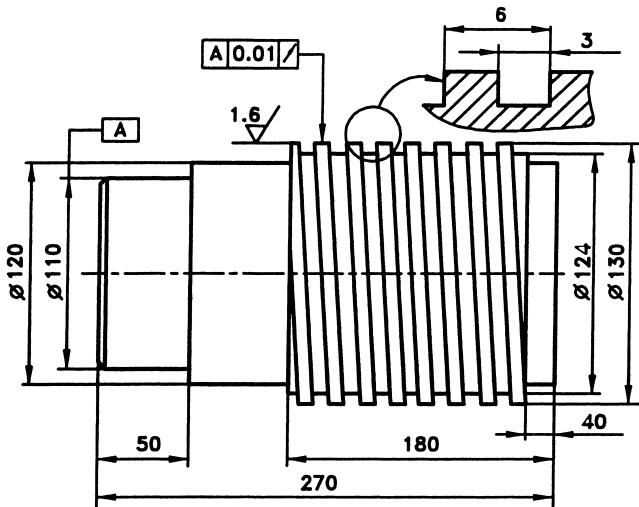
Configuration of the workpieces used in the experiments (dimensions: mm).
